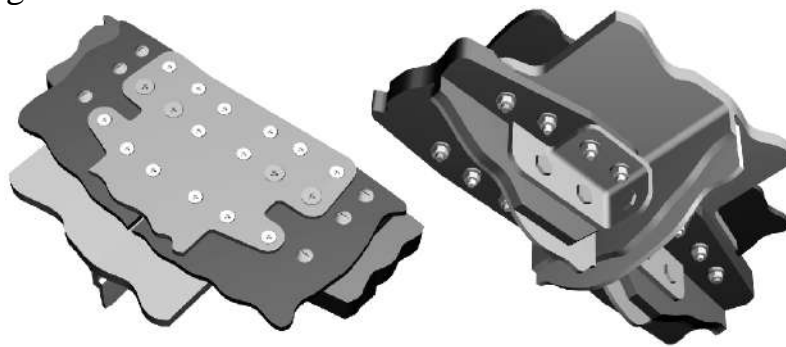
The analytical standard of assembly of wing center section spar and OWP attachment
